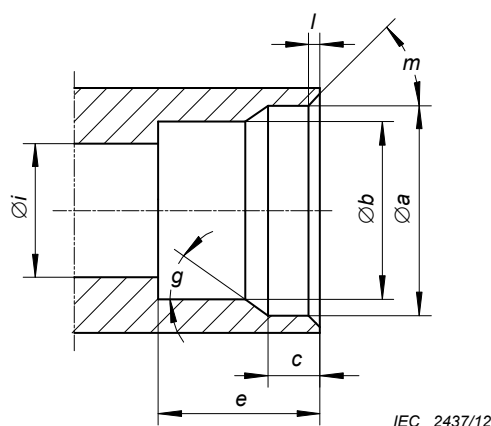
Gauge pin – Smooth bore for outer contact of connector with socket-centre
